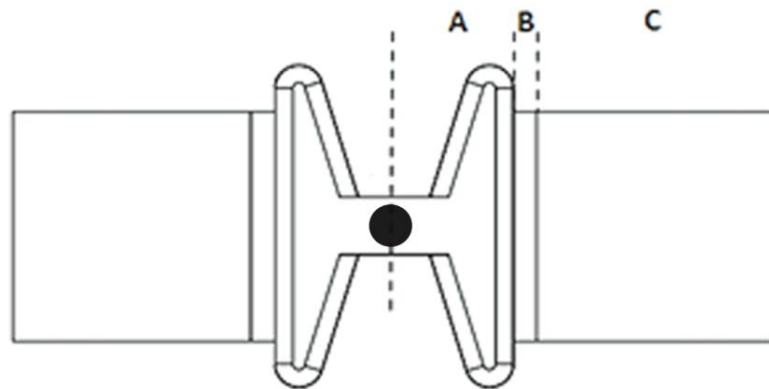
Different parts of mould: the runner (A), the rectangular gate (B), the square specimen (C). The black point represents the mould sprue.
